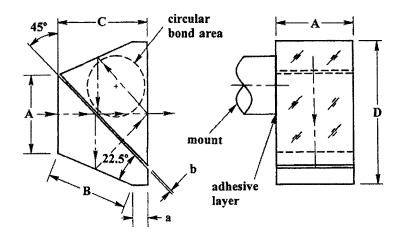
Pechan prism. (For design and analysis, use File 6.17 of the CD-ROM.) a = 0.207A = 0.310 in. (7.887 mm); b = 0.004 in. (0.100 mm) [assumed]; B = 1.082A = 1.623 in. (41.224 mm); C = 1.207A = 1.810 in. (45.987 mm); D = 1.707A = 2.560 in. (65.037 mm); $t_A = 4.621A = 6.931$ in. (176.060 mm); $V = 1.801A^3 = 6.078$ in.³ (99.601 cm³); $W = V\rho = 0.551$ lb (0.250 kg); $Q_{MIN} = V\rho a_G f_S/J = 0.017$ in.² (10.968 mm²); $Q_{MAX C} = 0.599A^2 = 1.348$ in.² (869.514 mm²).
